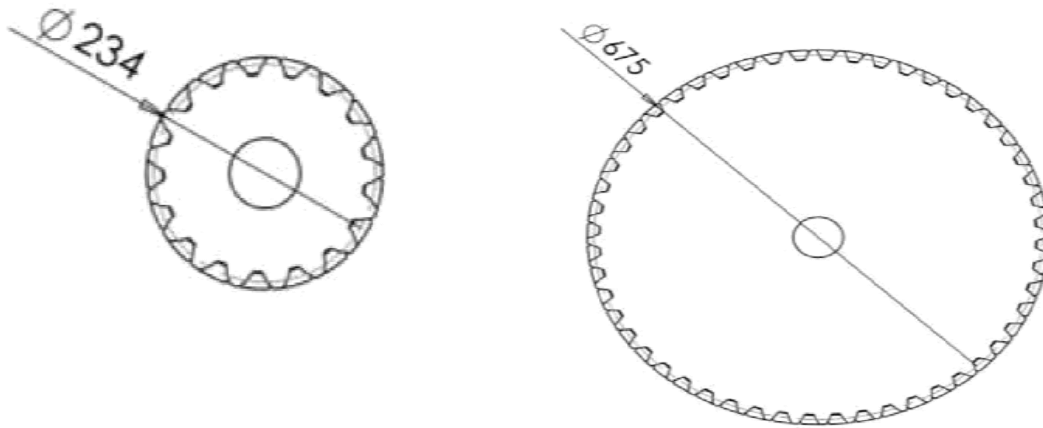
Module 12 Gear Dia 234 & Dia 675
